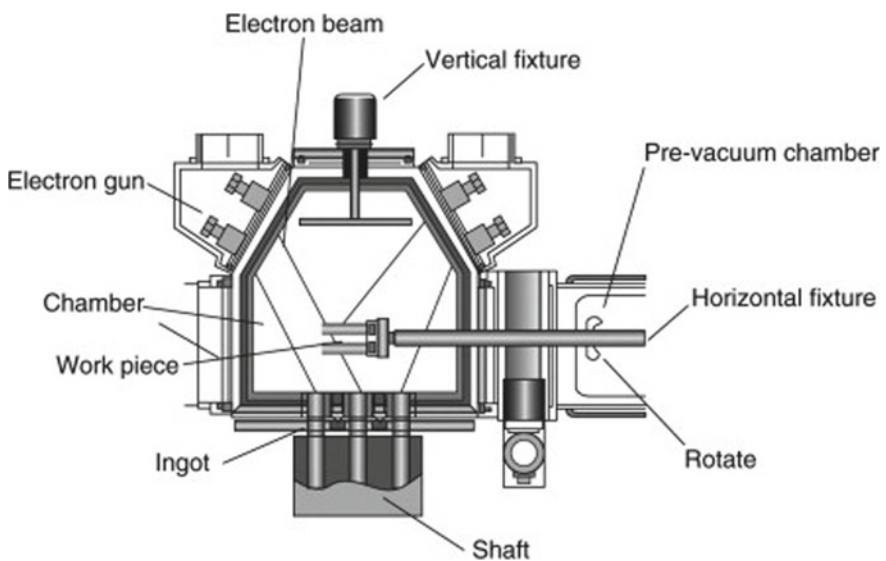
EBPVD coating chamber. *Image courtesy* Zhang et al. [52]
